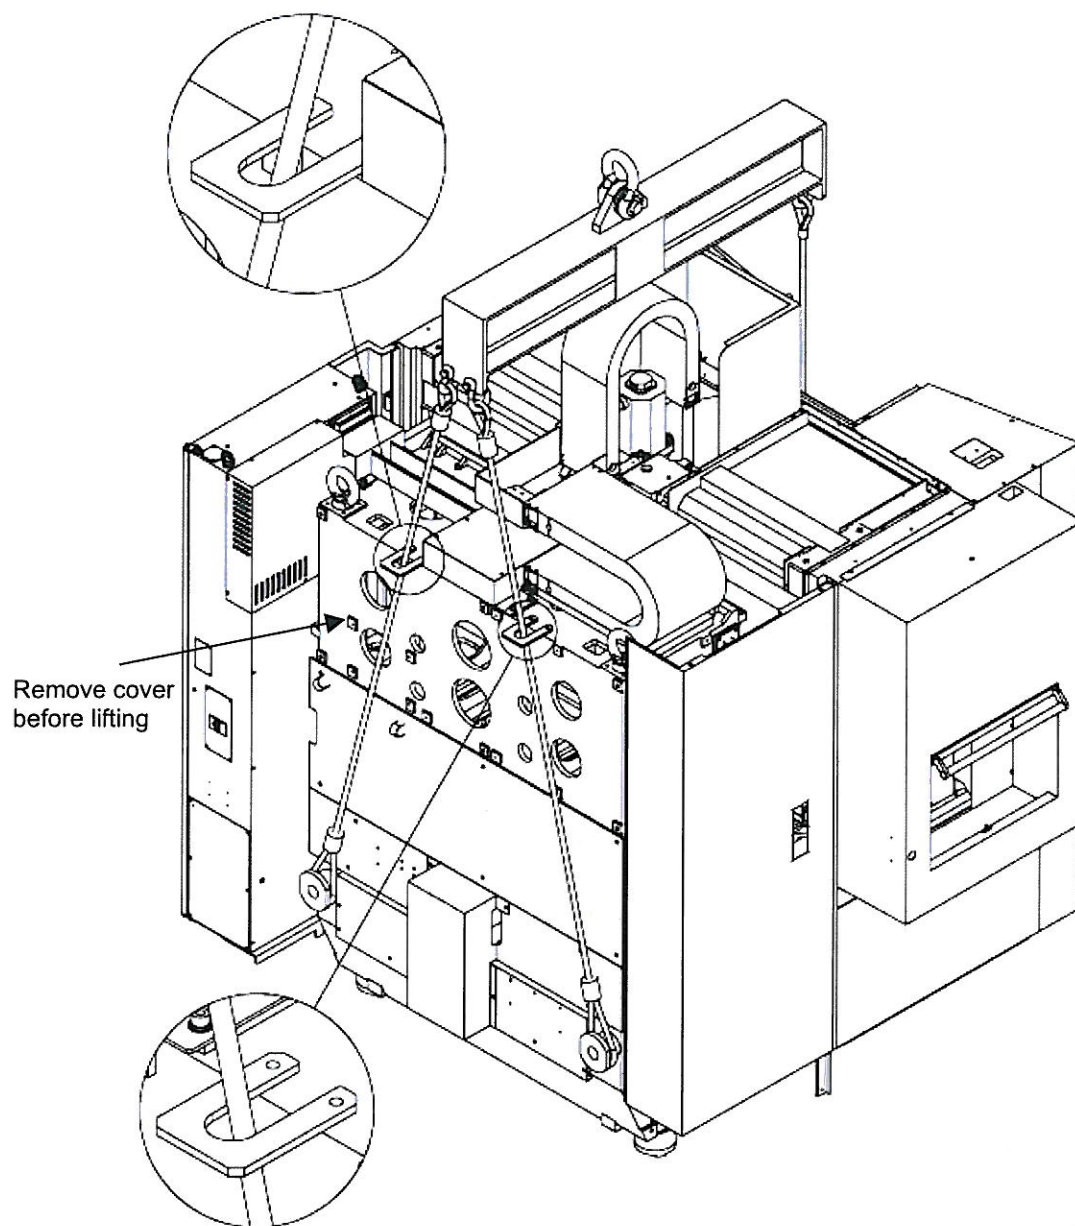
F3/F5 Machine Lifting (Rear)
